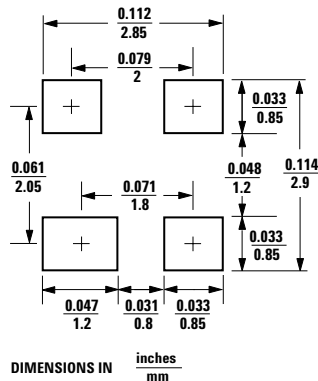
Recommended PCB Pad Layout for Avago Technologies' SOT-143 Products.
